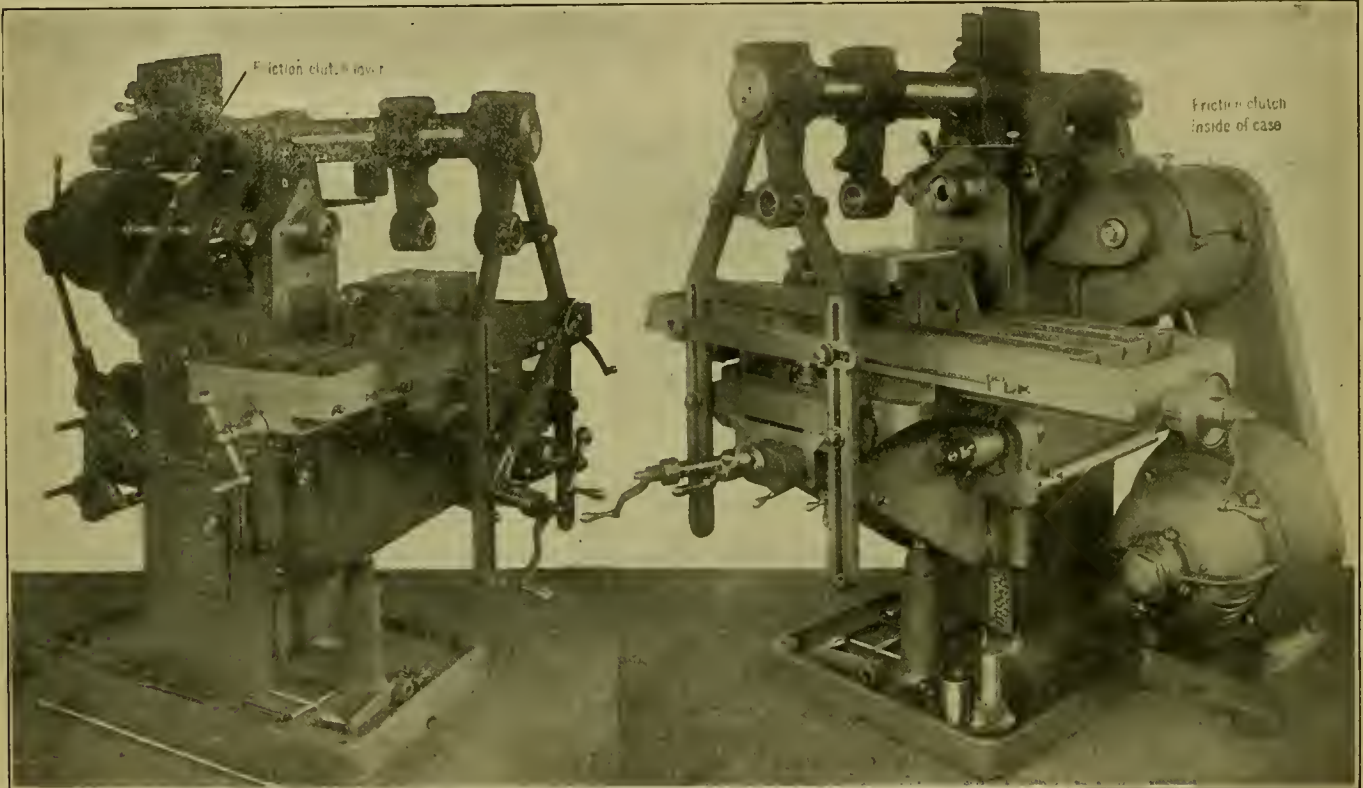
FRONT VIEW OF TOOL, SHOWING CONVENIENT ARRANGEMENT FOR OPERATING HANDLES.
